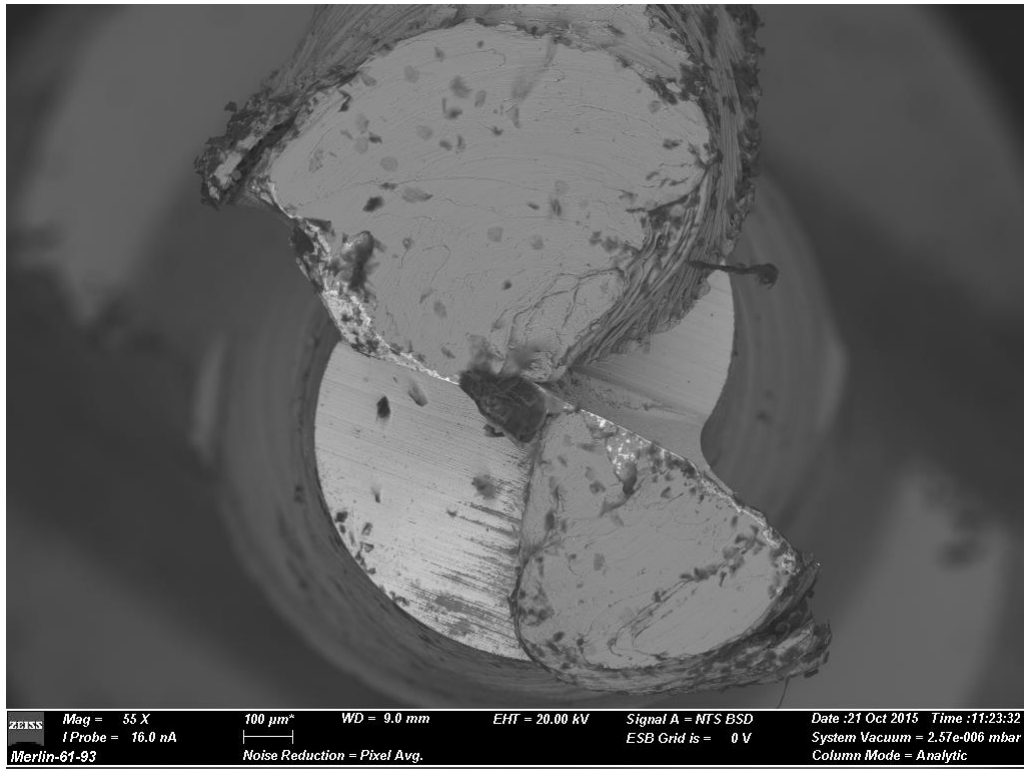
Experimental run 9: Tungsten carbide tool after machining with parameters $v_c = 75.4$ [m/min], $v_f = 960$ [mm/min] and $a_p = 125$ [μm]
